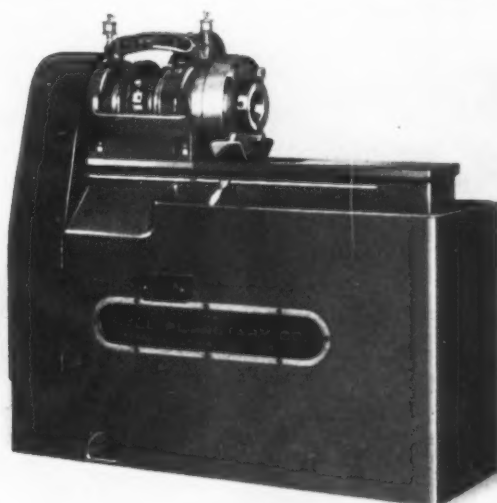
Planetary Machine Milling External and Internal Threads at the Same Time
